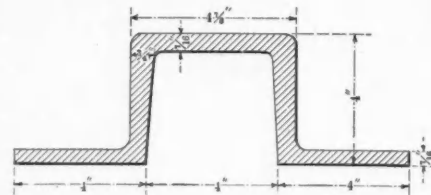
STEEL GUIDE, CHANNEL-SECTIONS TYPE
